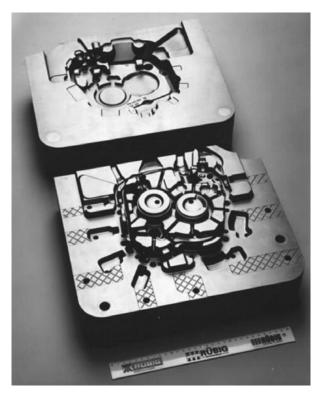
PECVD Ti(C,N) coated die (AISI H13 hot worked steel) for aluminum pressure die casting of an oil pump housing.
